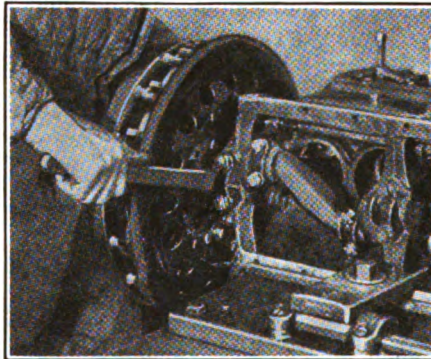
REMOVING THE CAP SCREWS WHICH HOLD THE TRANSMISSION TO THE CRANK SHAFT
